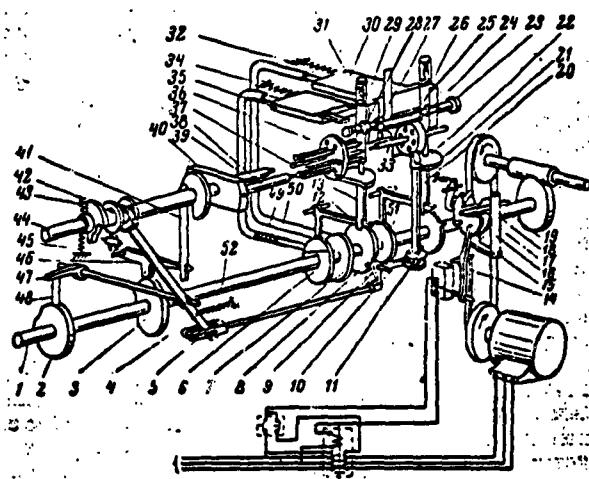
Kinematic layout of the machine for mounting the recess insulation in a stator with straight recesses.
